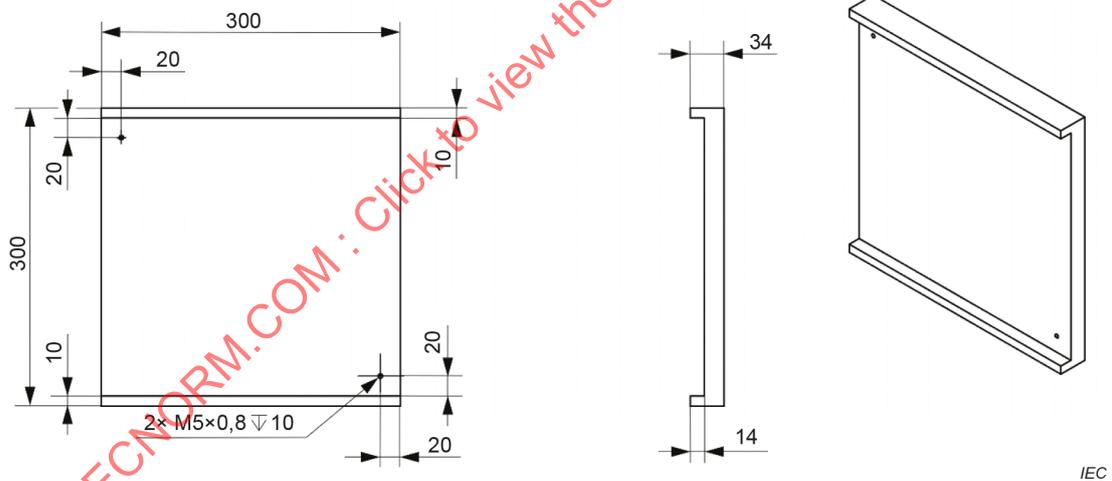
Subassembly of the material detection in air phantom (Figure A.2), metal comb, one tooth
